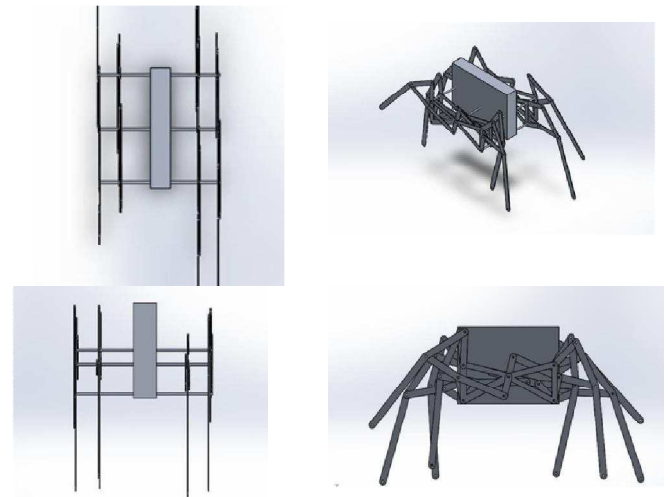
Orthographic and isometric views of the robot final design. From top left (clockwise) top view, isometric view, side view and front view of the robot.
